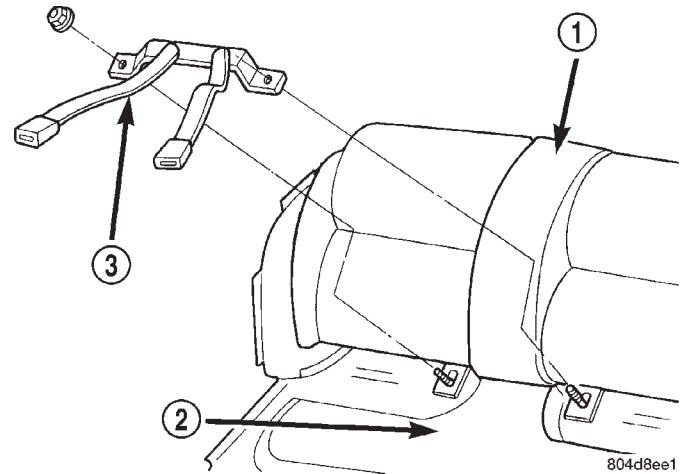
REAR SEAT BELT BUCKLE ASSEMBLY
